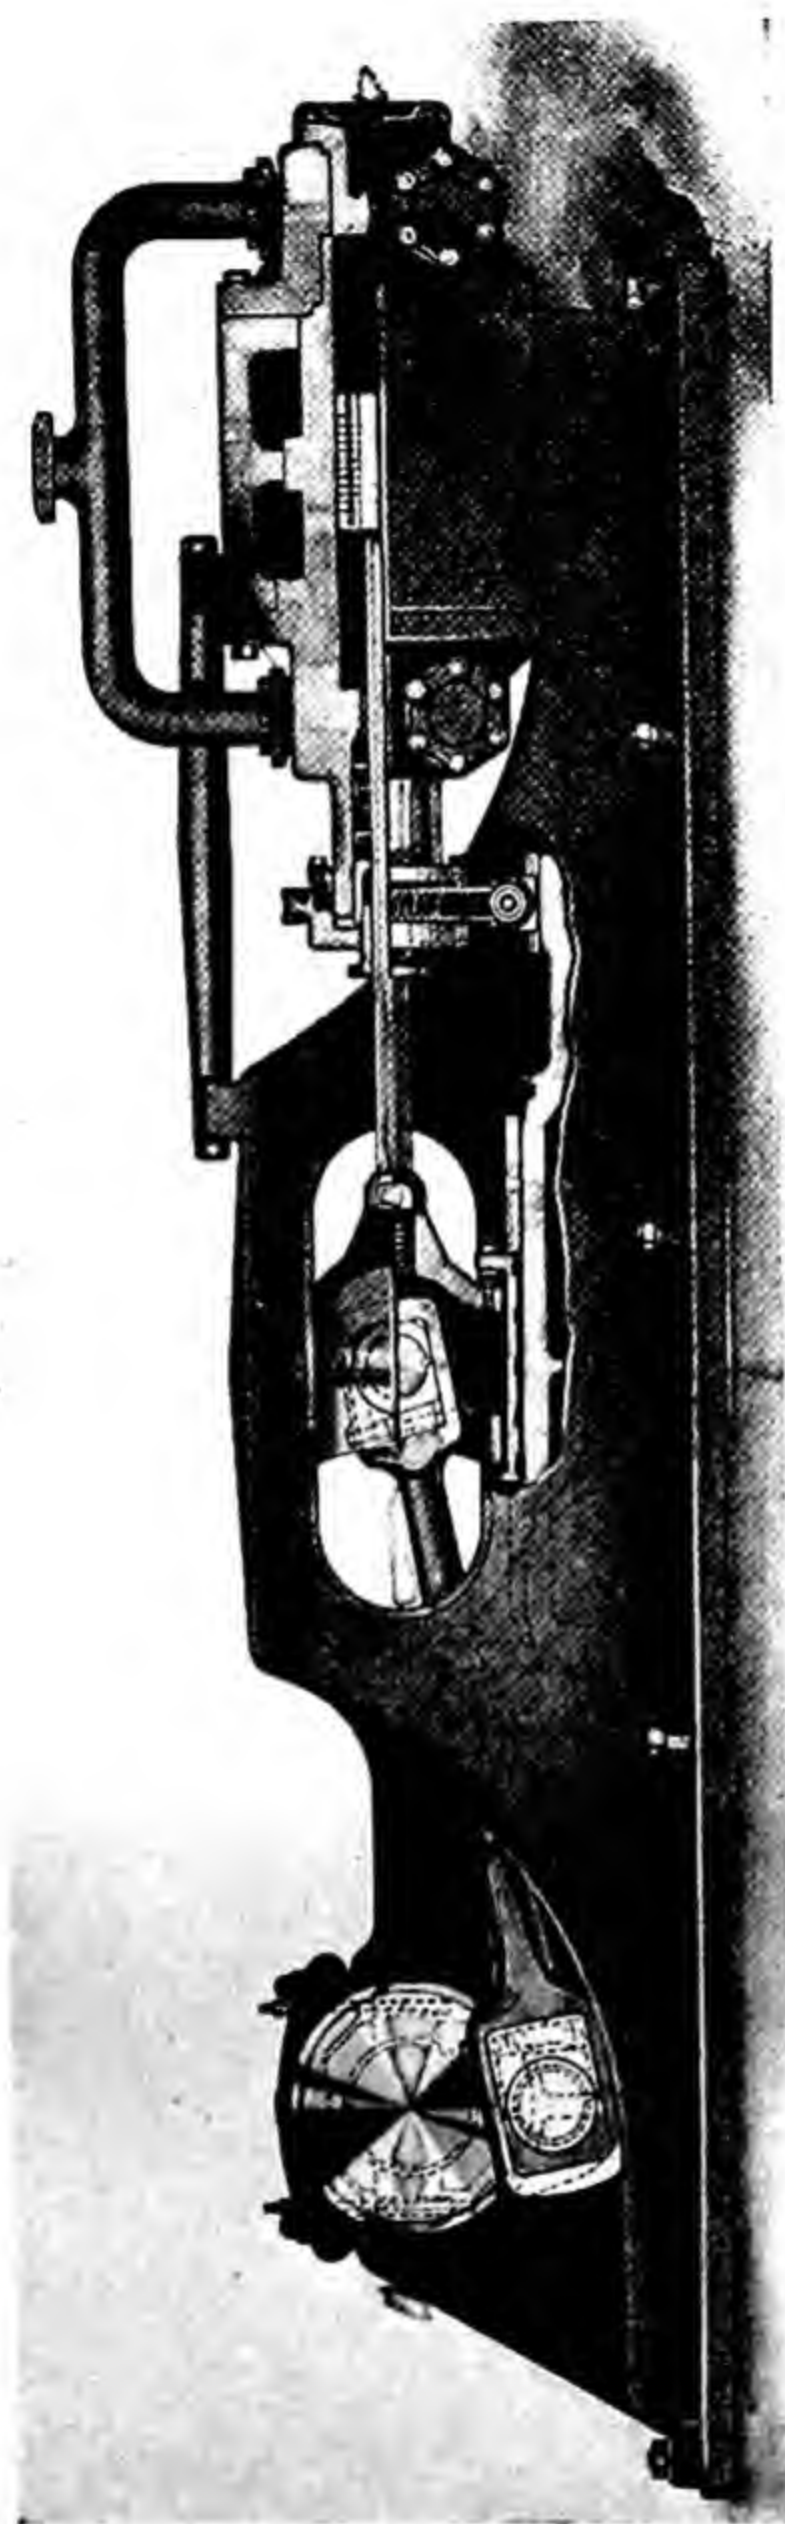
Cross-Section American Carbonic Machinery Compressor.
